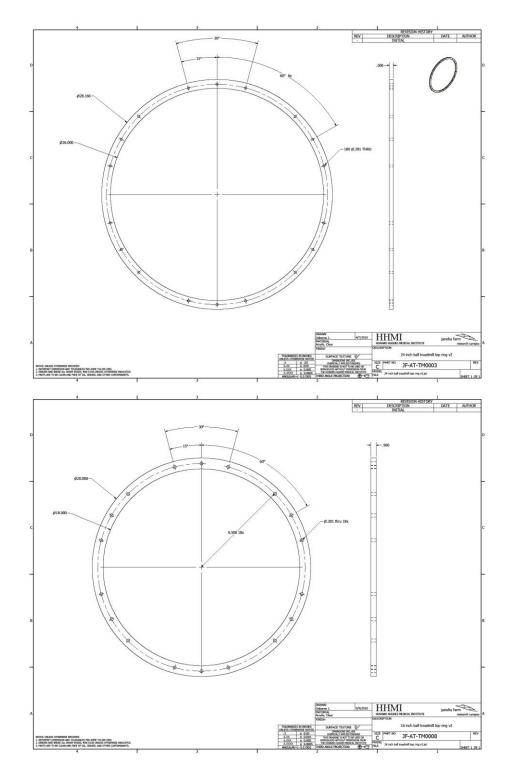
Treadmill frame top ring. (Top): 24" treadmill frame top ring. (Bottom): 16" treadmill frame top ring.
